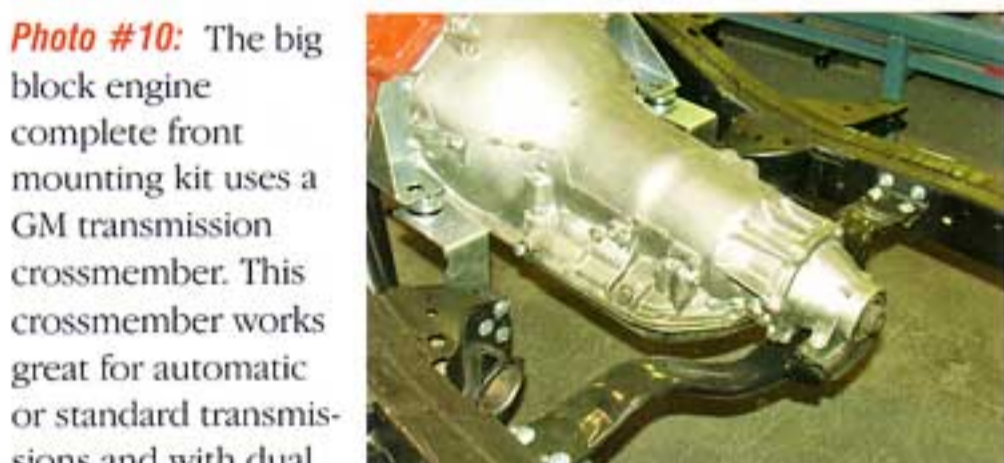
The big block engine complete front mounting kit uses a GM transmission crossmember. This crossmember works great for automatic or standard transmissions and with dual or single exhaust. In January 2001 we introduced a new tubular transmission crossmember P/N 19-153 to replace the stock GM type crossmember.
